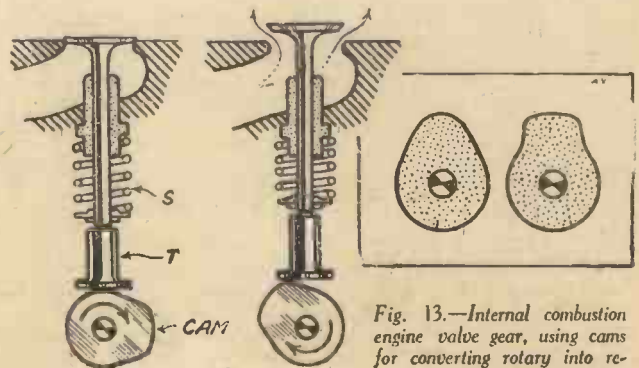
Internal combustion engine valve gear, using cams for converting rotary into reciprocating motion
